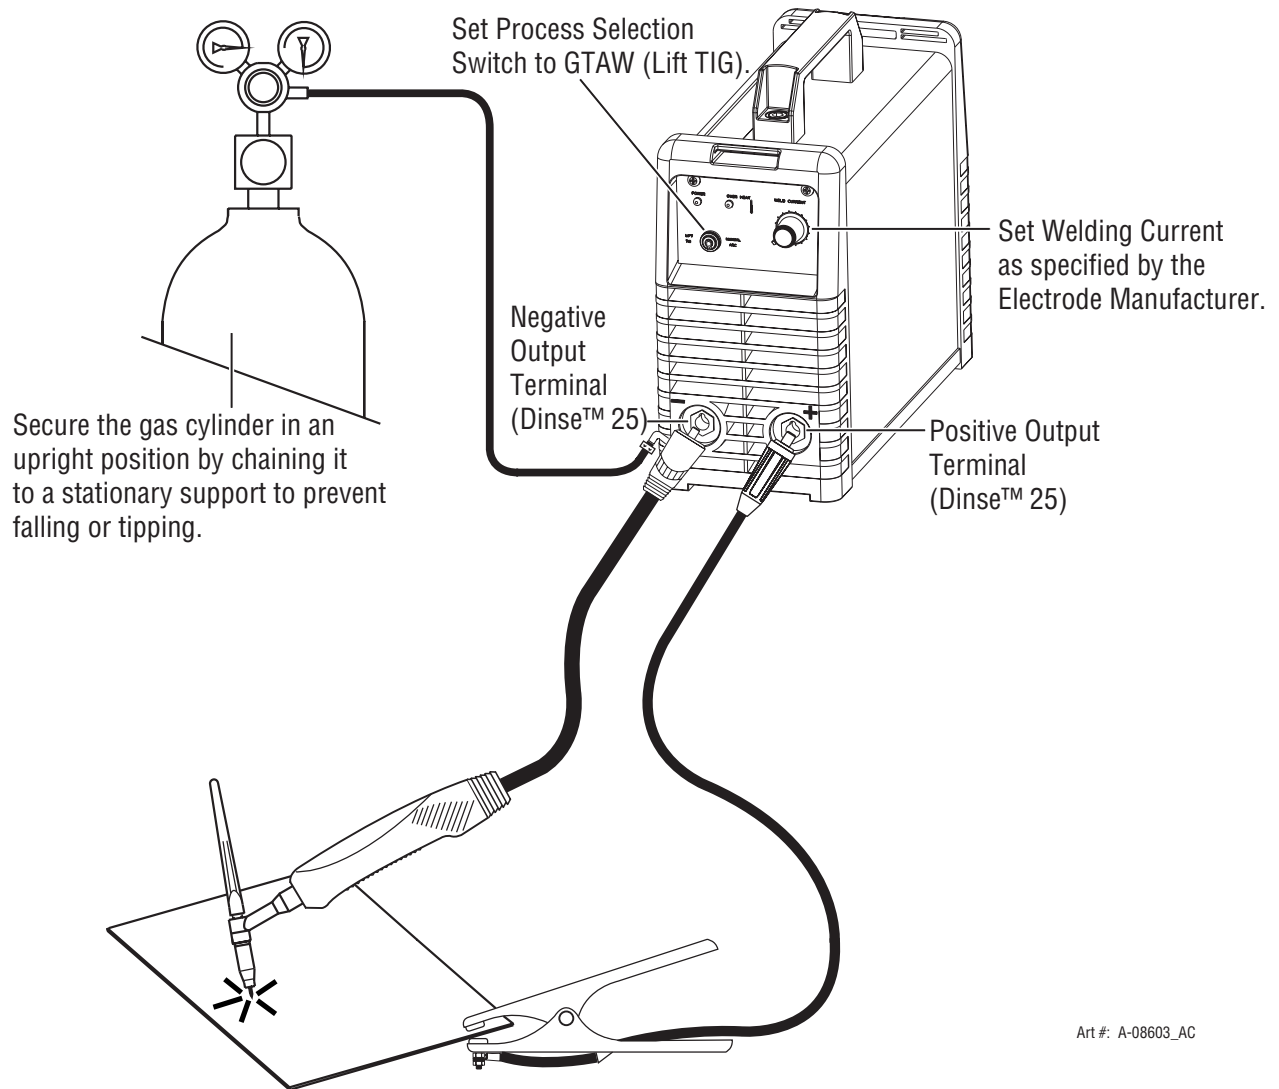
Setup for GTAW (Lift TIG) Welding
